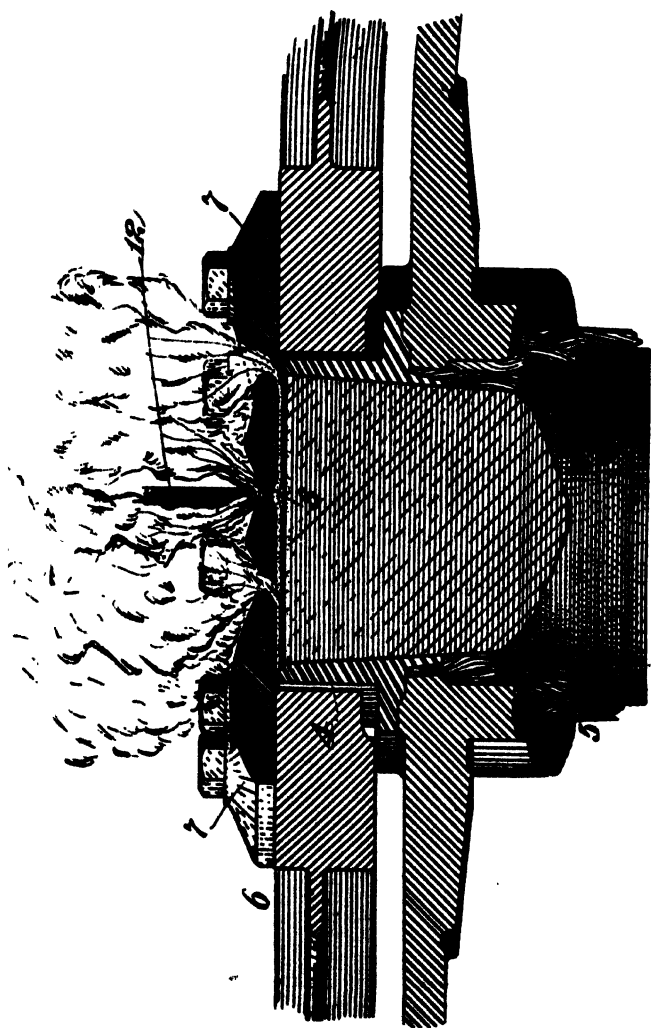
Ginnery, Compress, End Packed Cylindrical Bale.
